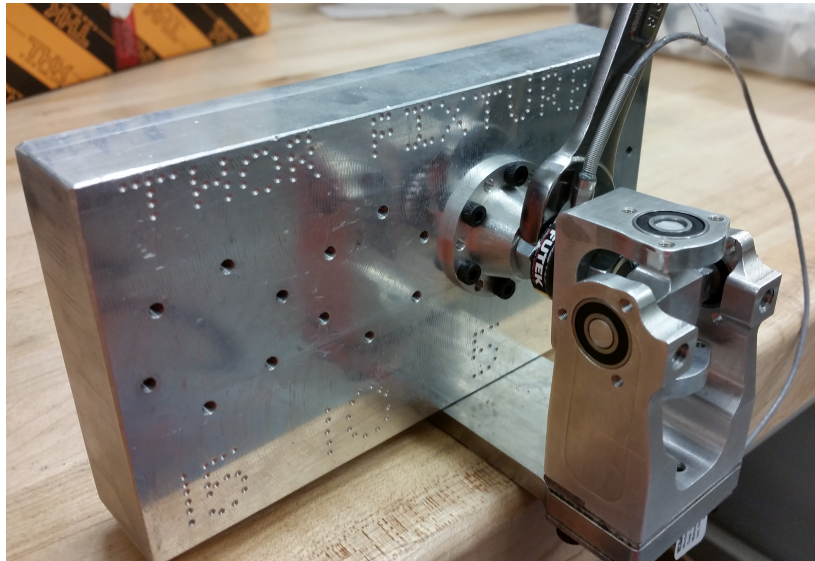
Custom jig used to set the alignment angle of the motor housings and load cell cables within the upper universal joint.
